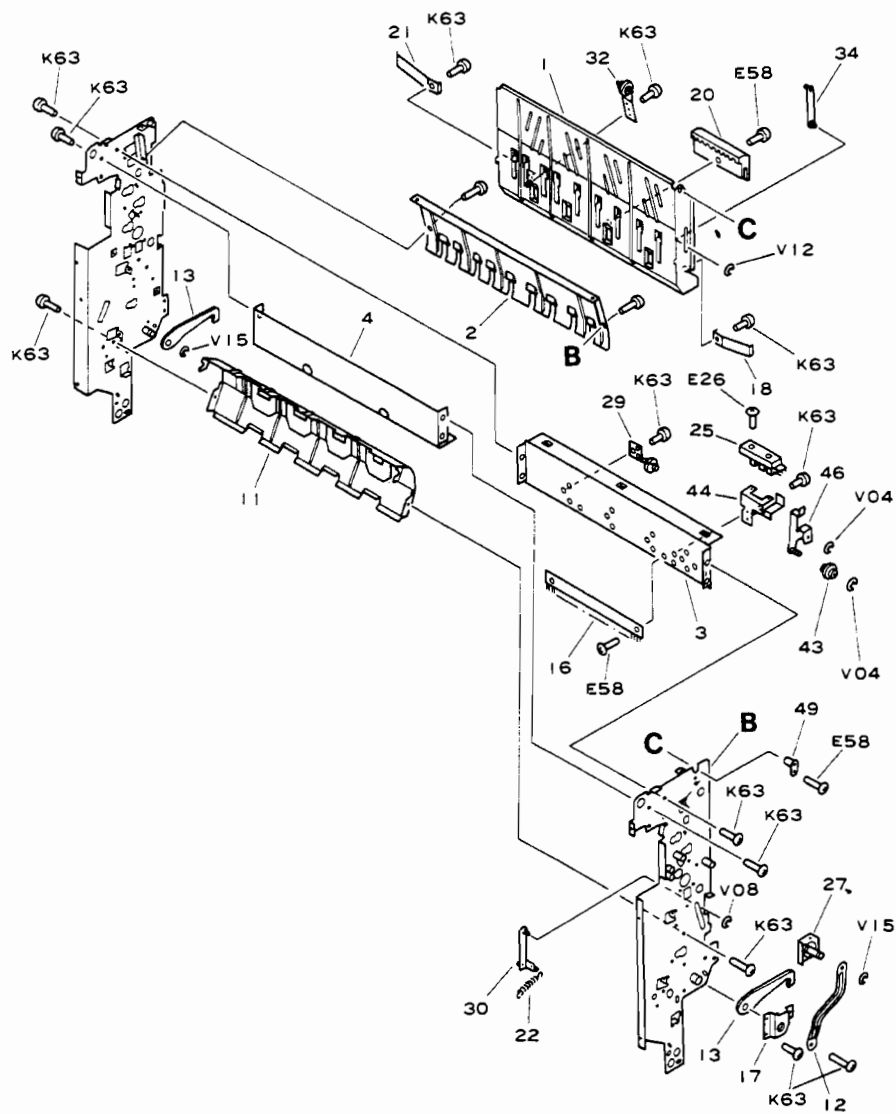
9. Switchback Feeder Assembly 1 (1 of 2)
